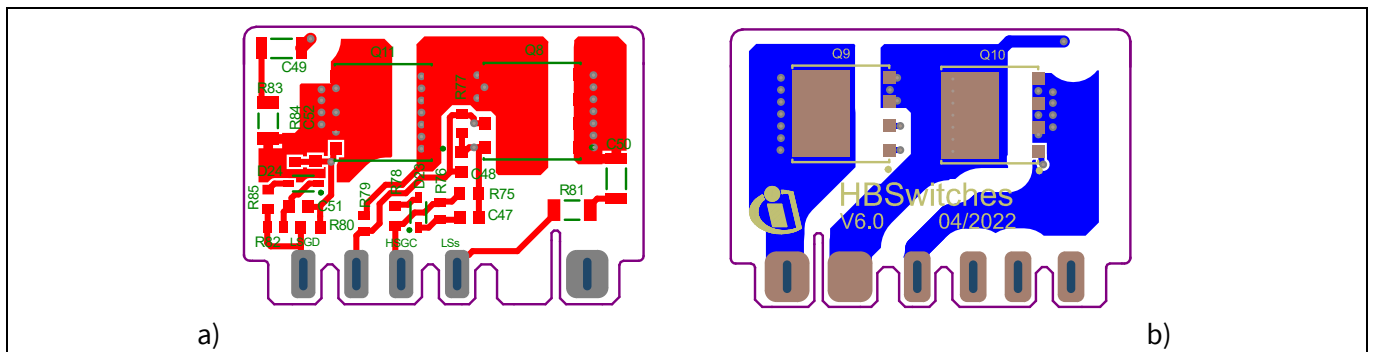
PCB of the half-bridge board: a) top side and b) bottom side
